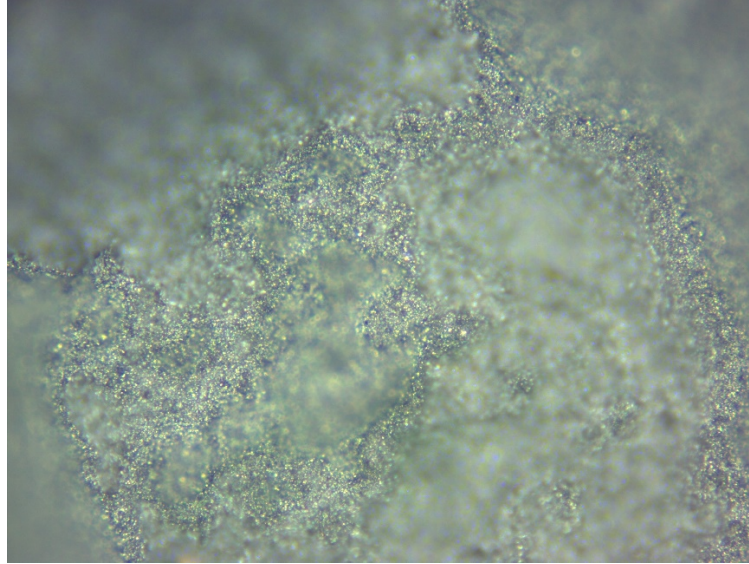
Fracture Surface of Wrought Tensile Sample (50x)
